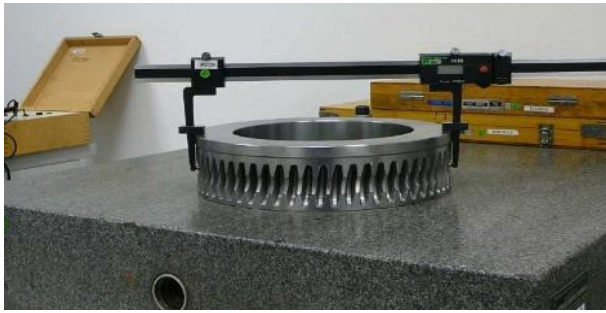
Measuring a semi-finished product with a spacing circle using balls
